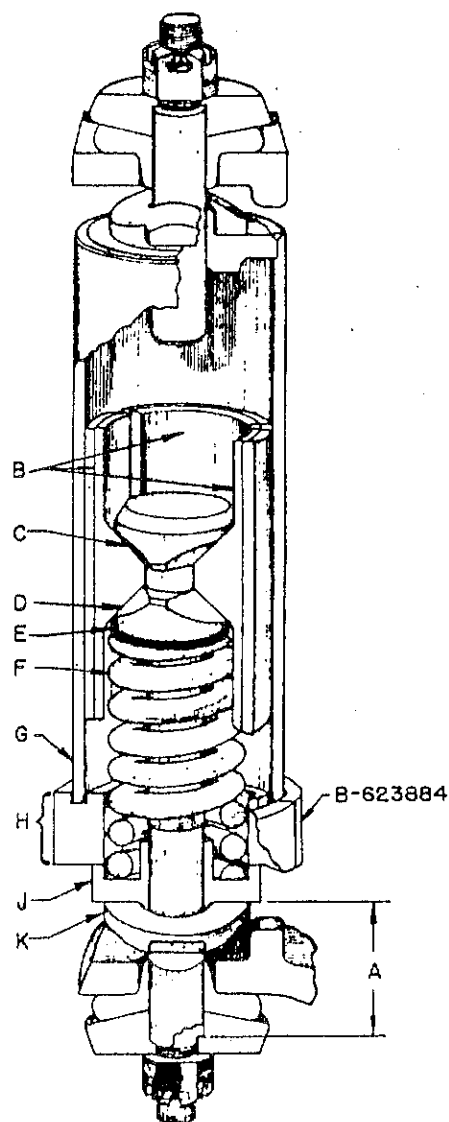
HOUDAILLE-HERSHEY SPRING SNUBBER
